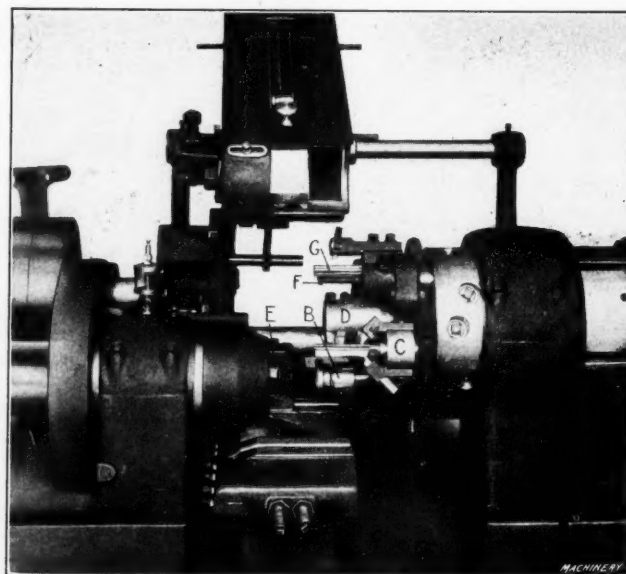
Conveyor in Position to insert Rough Casting in Chuck
